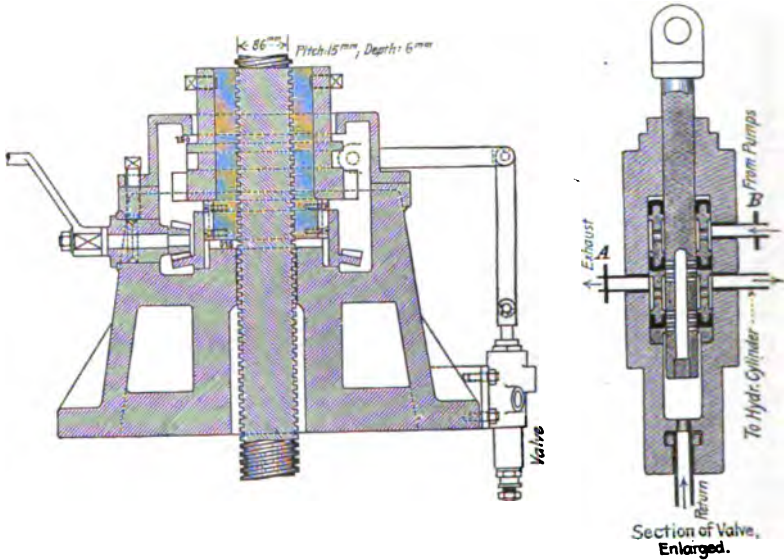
VALVE MECHANISM FOR HYDRAULIC JACK.
